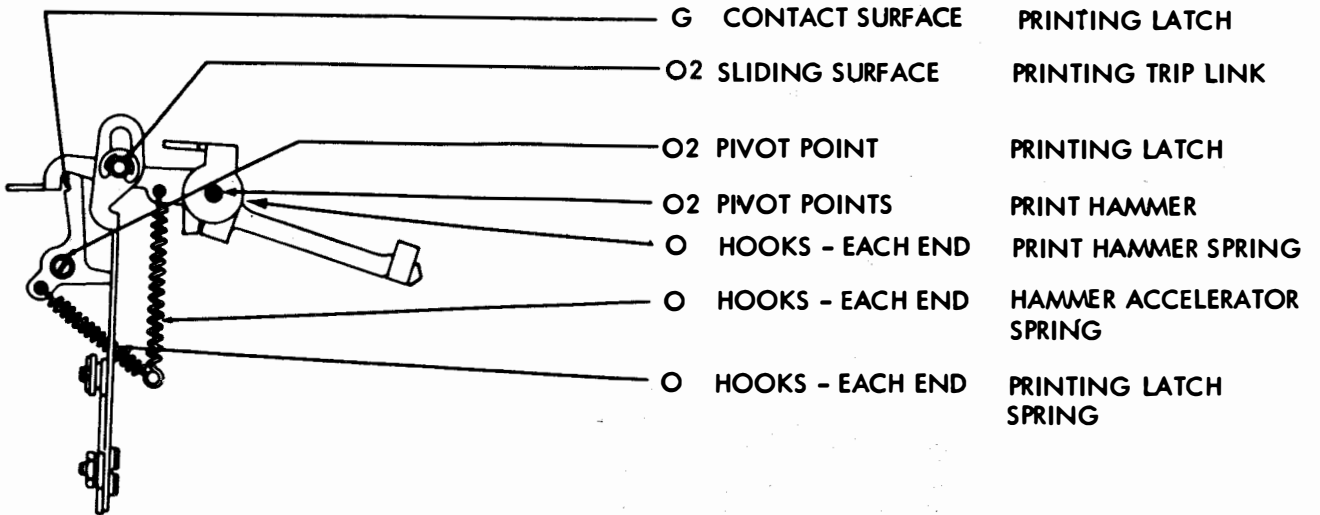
Printing Mechanism (Typing Perforator Only), Left Side View
